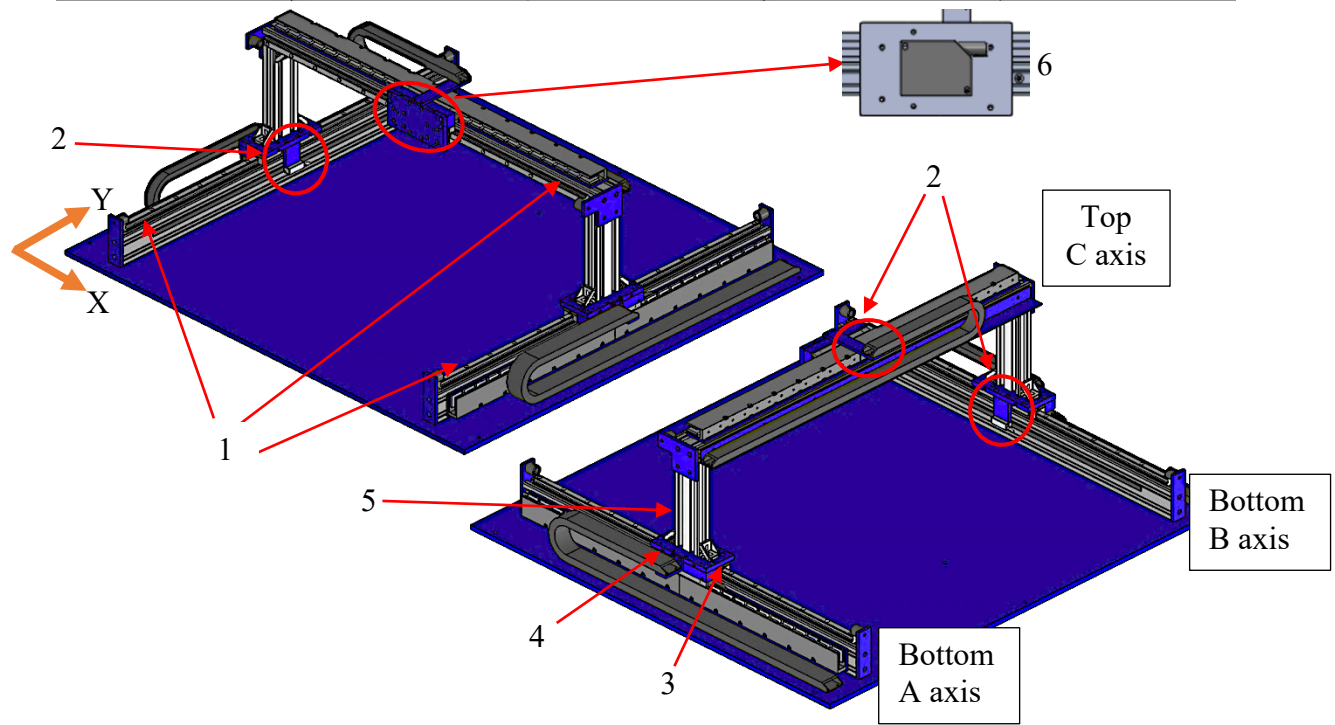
Gantry H-type system 1) Slide rails 2) Encoder sensors 3) Bearing block 4) Motor coil 5) Aluminum frame 6) Laser sensor mounted on the plate
